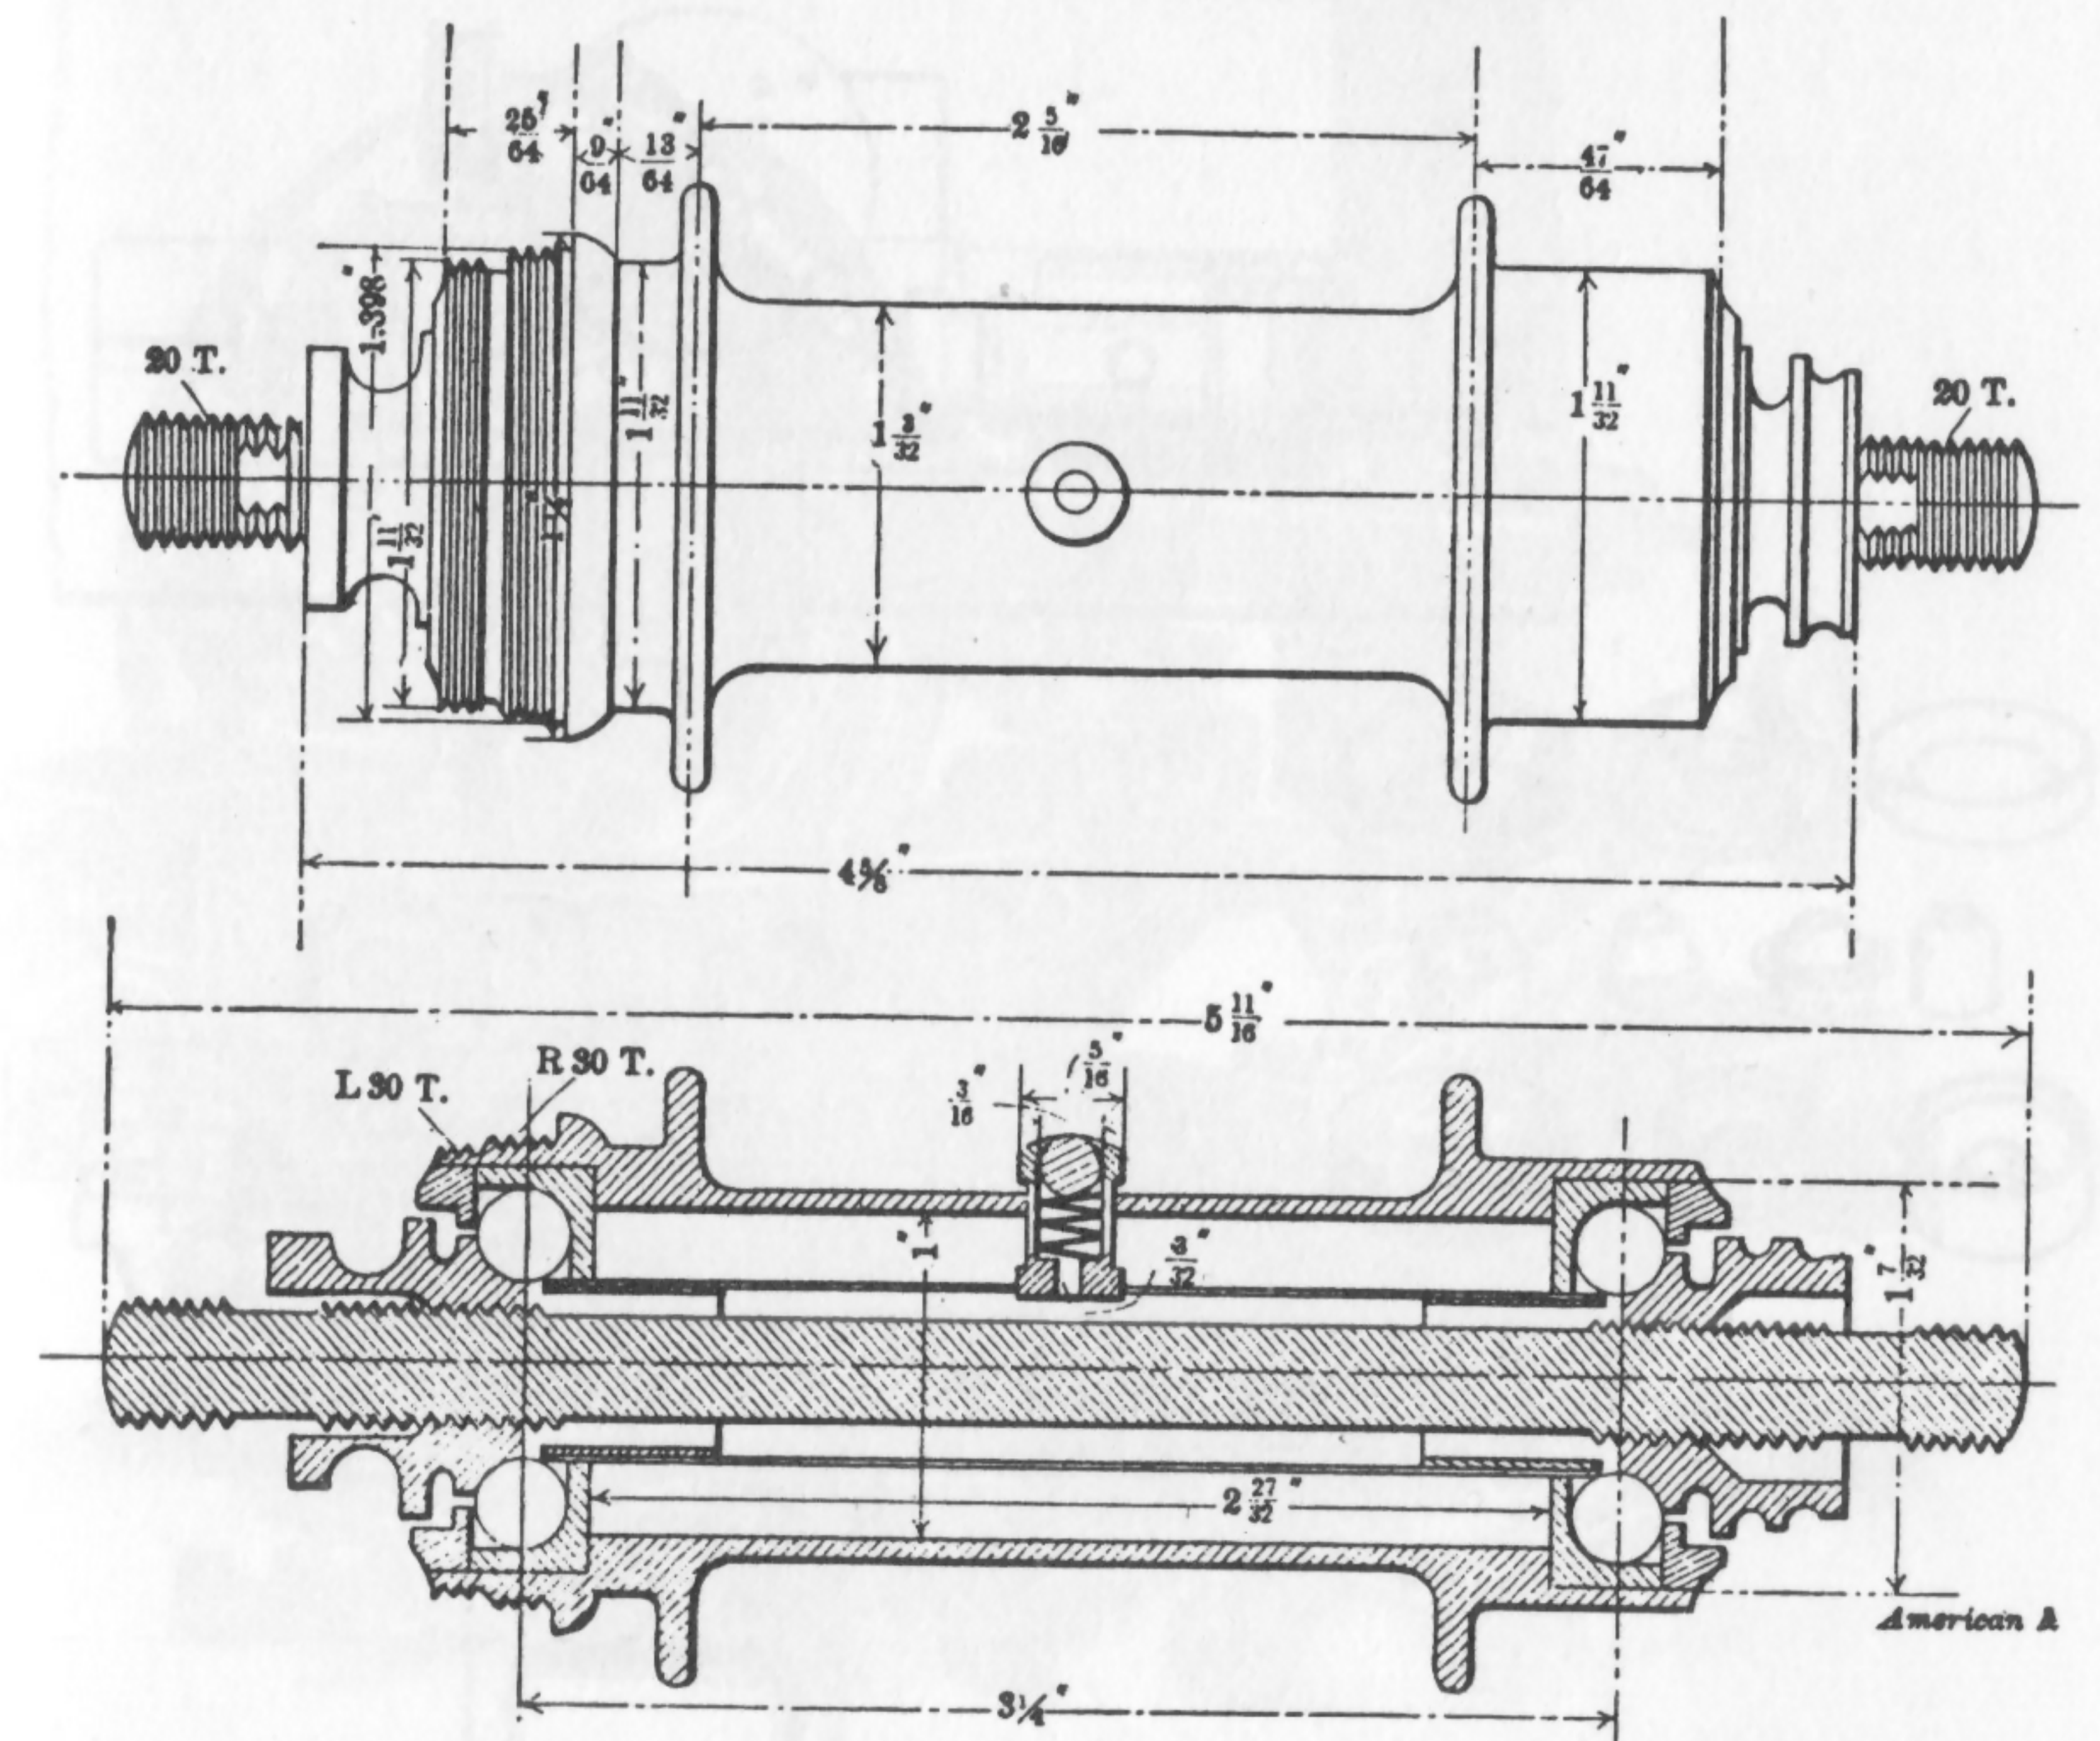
BICYCLE BALL BEARINGS, 1896 (*American Machinist*)
